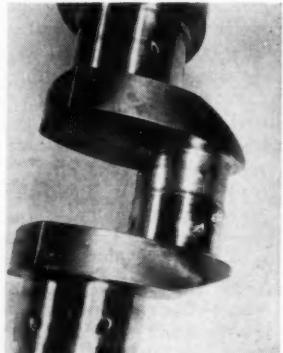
Condition of crankshaft operated with bearings shown in Fig. 2
